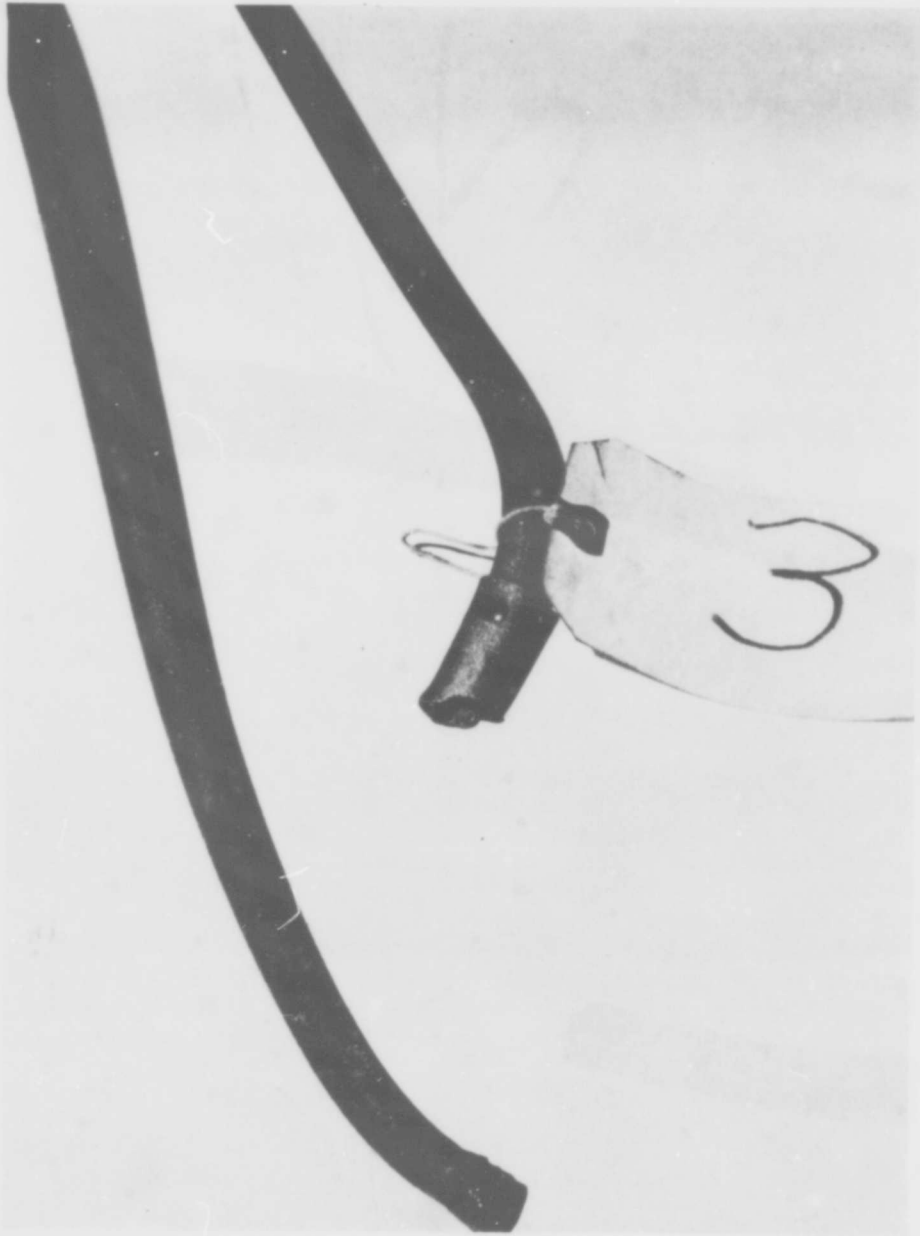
Ring No. 3 joint failure caused by inadequate thickness of rod coupling wall (note short fillet weld). G3493
